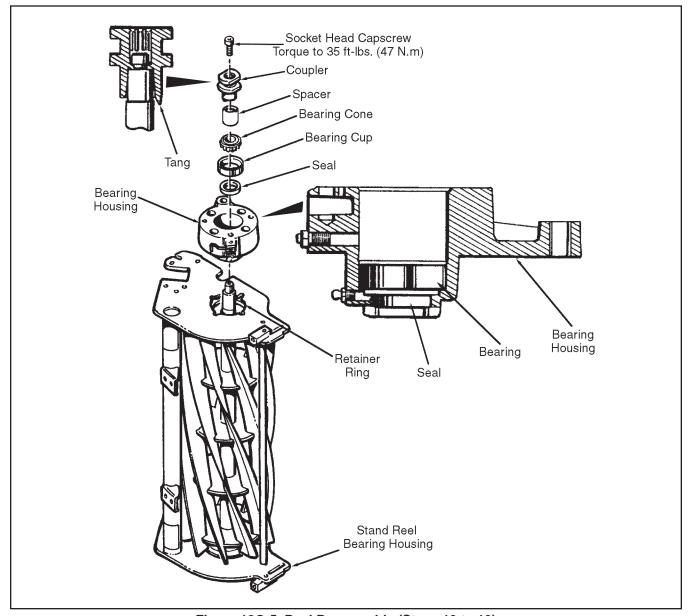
G-5. Reel Reassembly (Steps 13 to 19)
